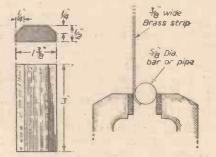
Method of bending the brass strip. Fig. 2. - Bracket mounting block.
